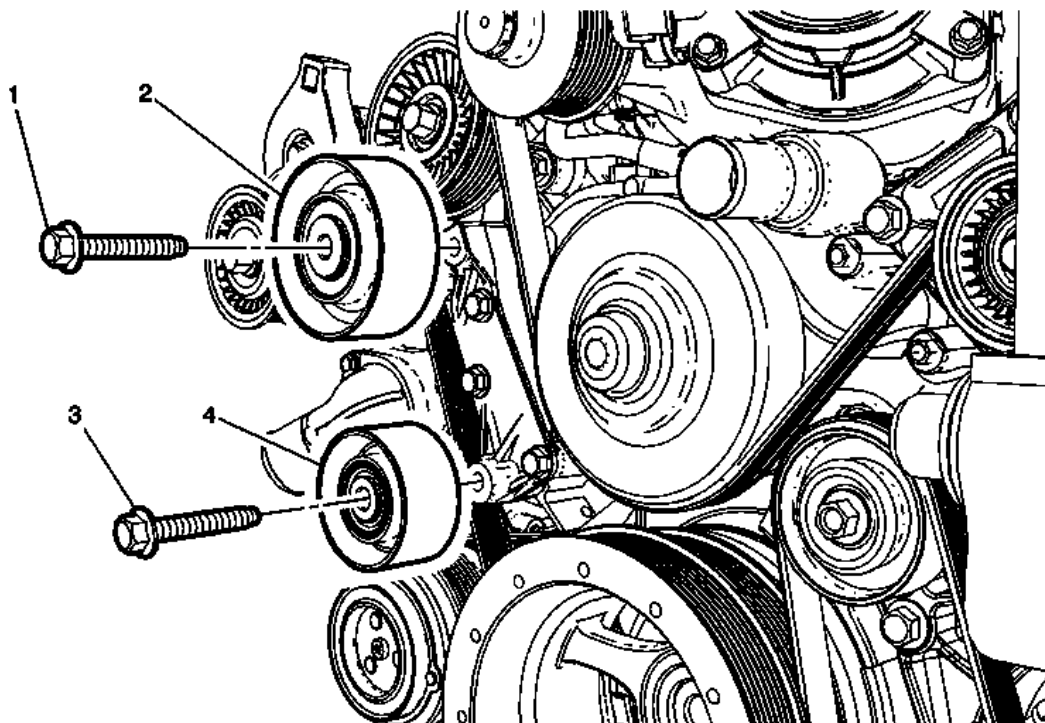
Supercharger Belt Idler Pulleys & Fasteners
